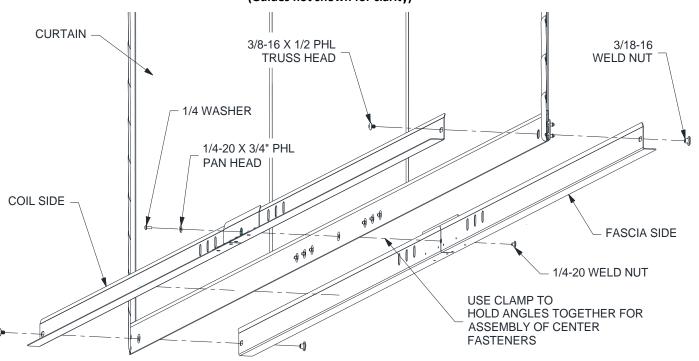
Segmented Bottom Bar Outer Angle attachment – Larger Doors (Guides not shown for clarity)
